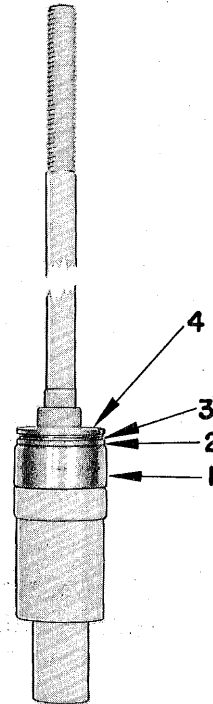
Showing thrust washers, thrust bearing and pinion bearing in position on spindle
